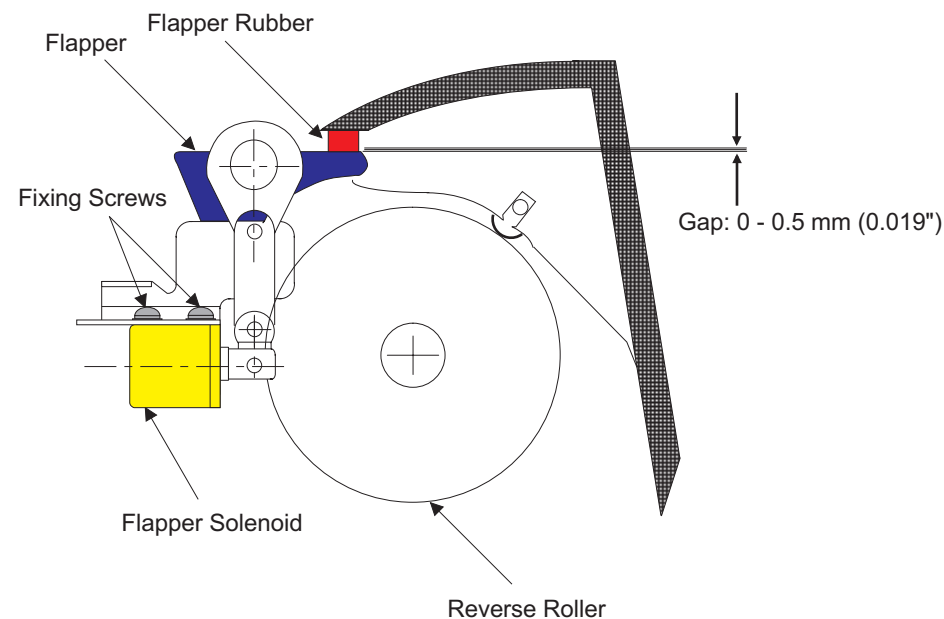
Flapper Solenoid Installation Position Adjustment
